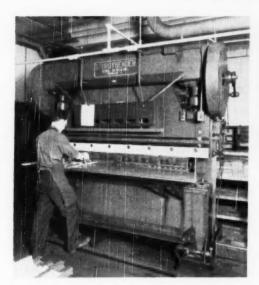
PRESS BRAKE WITH 20 INDIVIDUAL PUNCHES AND DIES FOR PERFORATING FLAT NARROW-TYPE MOUNTING PLATES
